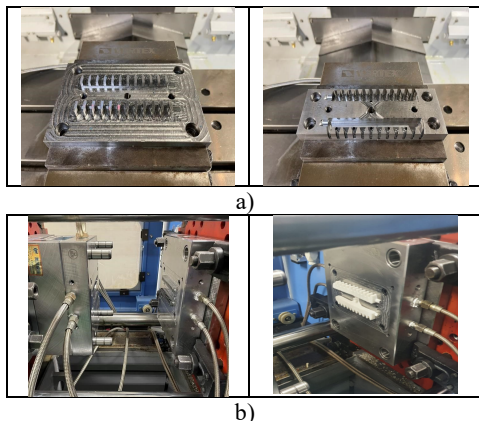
TPE Hollow Gripper a) Mold [1] and b) Injection Molding Machine
